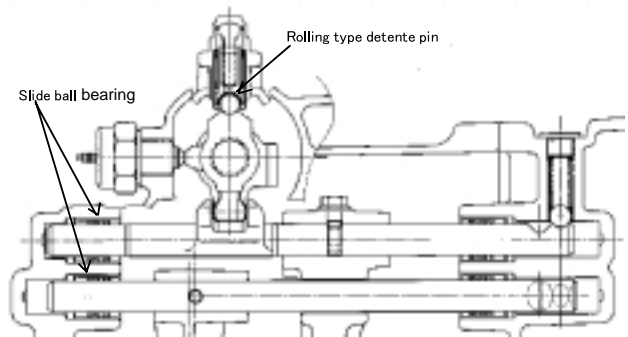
Rolling Type Detent Pin and Slide Ball Bearing
